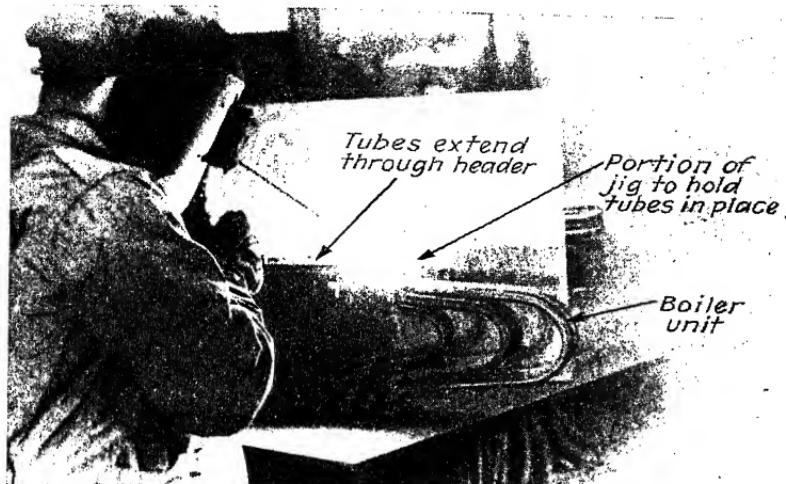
Welding heating boilers at American Airlines' Chicago Terminal.
